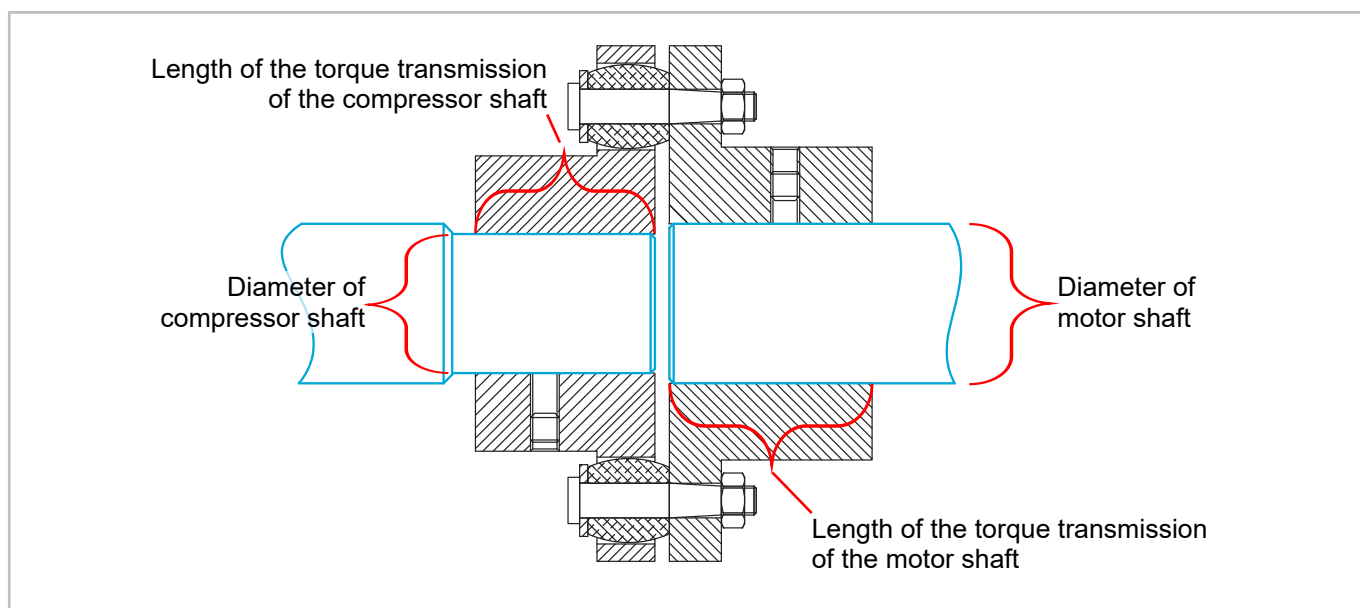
This coupling fits both the compressor and the motor: The length of the torque transmission for both shafts is equal to or greater than the diameter of the respective shaft. (Shown here to scale, but without specific dimensions. These are listed with the respective coupling).
